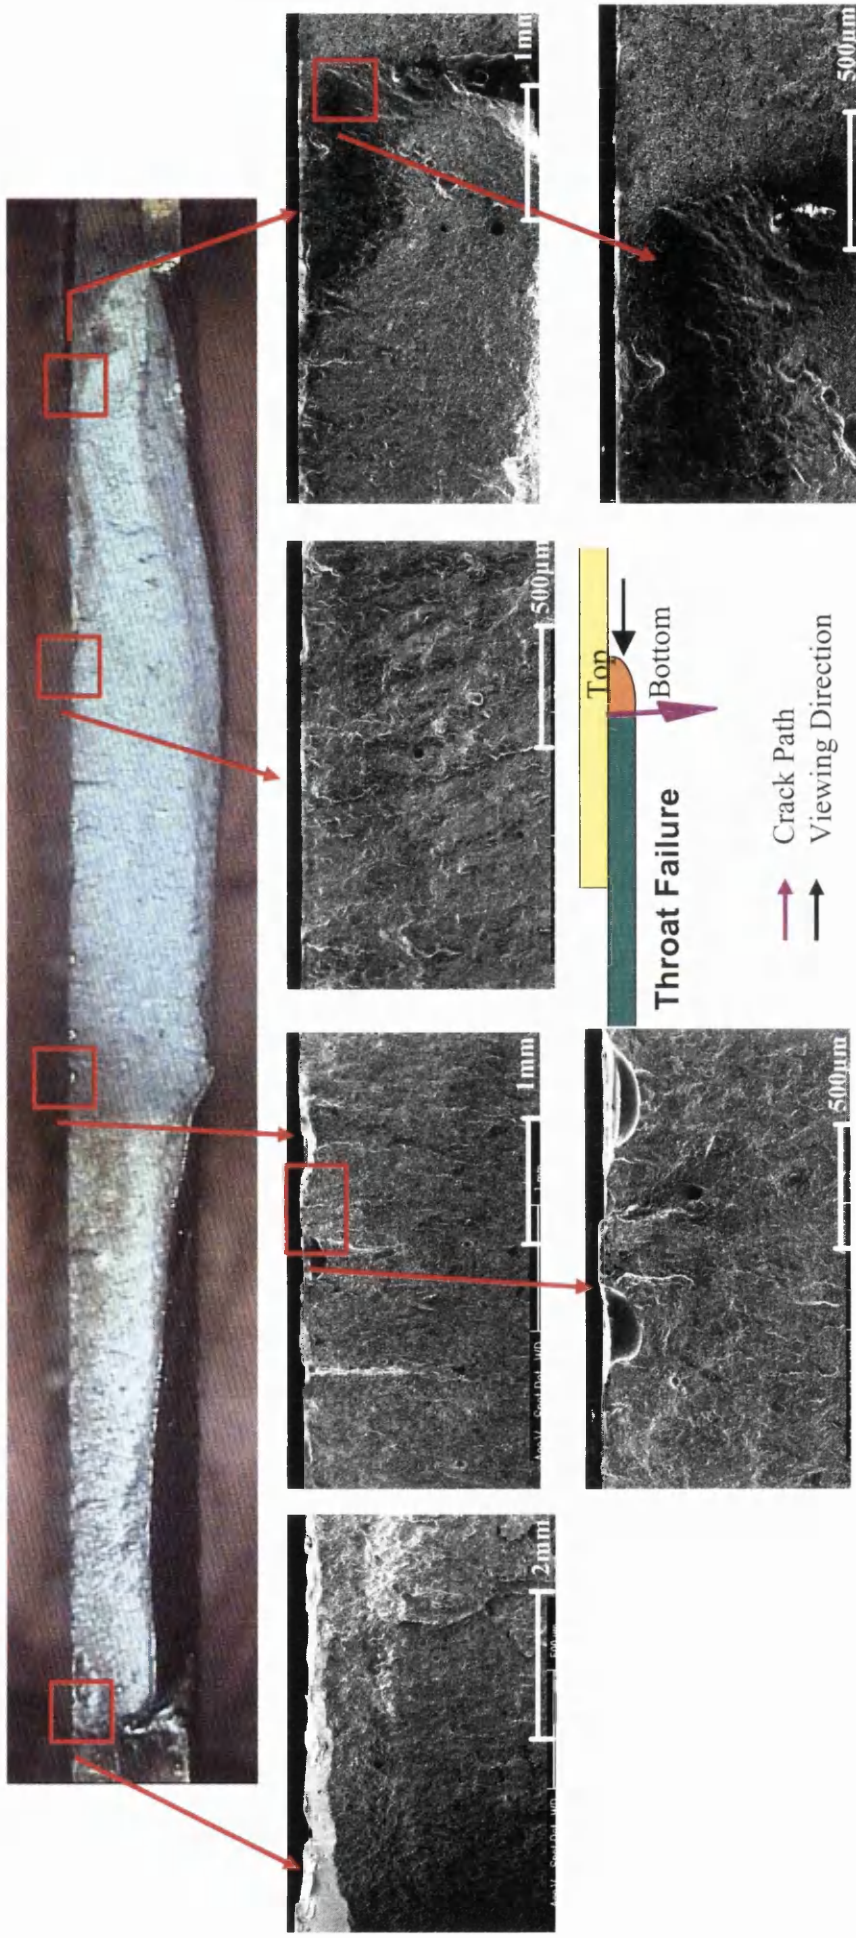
Typical Fracture Surface for TM1 Weld Throat Failure – Sheet View
